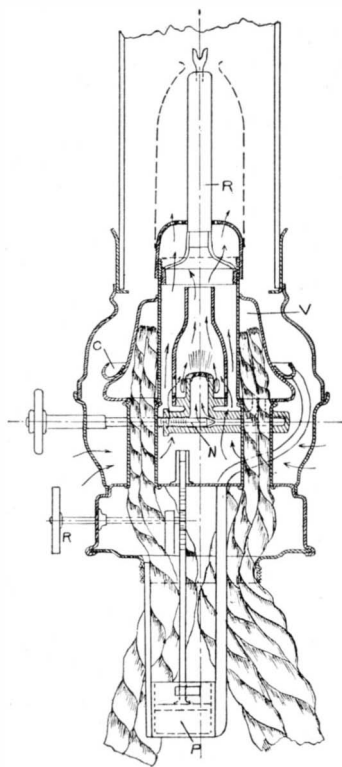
SECTION THROUGH COHN TABLE LAMP.
